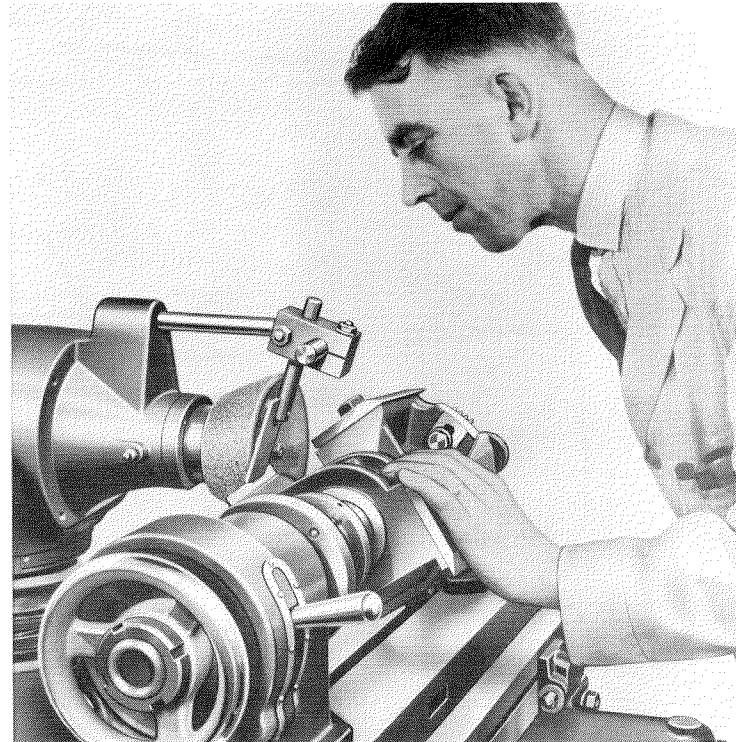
Showing the actual operation of grinding, indicating the best position for the operator.
